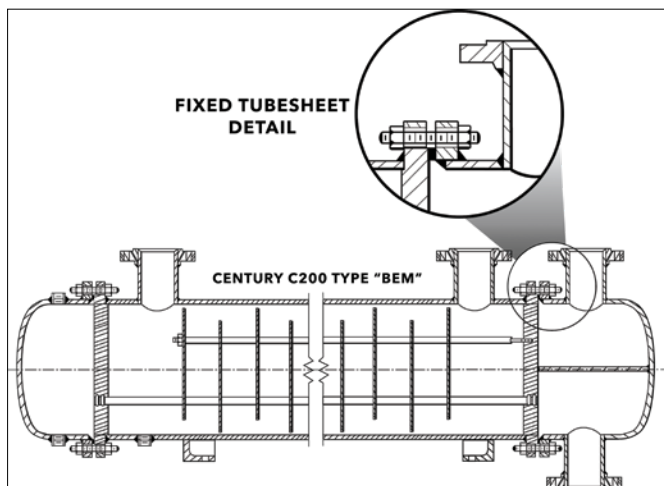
In a fixed tubesheet exchanger, straight runs of tubing are attached to two perforated tubesheets. The design has no shell-side gasket or packed joints. This minimizes the potential for leakage, and makes this exchanger ideal for high-pressure operations, or those handling potentially lethal fluids
